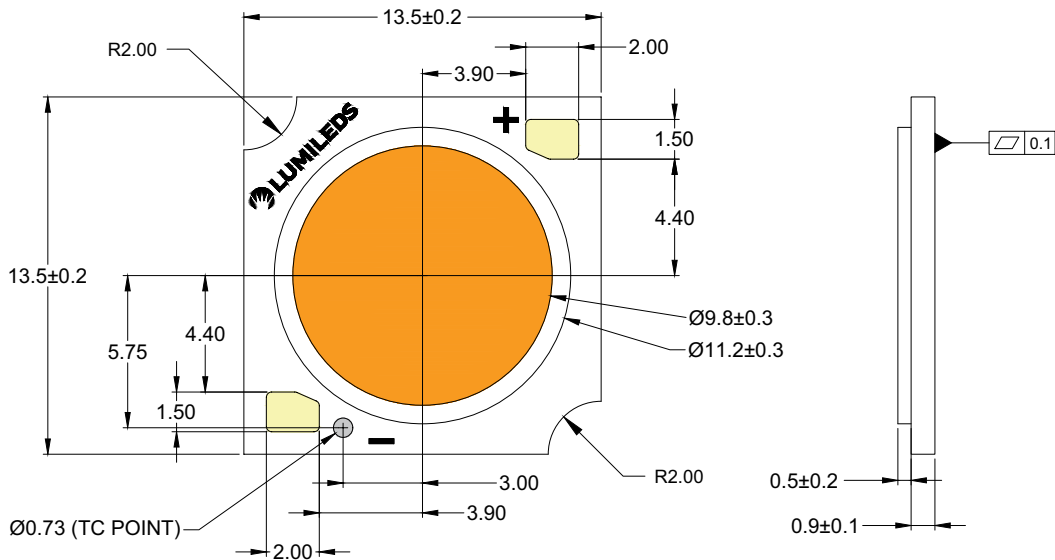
Mechanical dimensions for L2C6-xxHGxL03x0900 and L2C6-xxHGxL04x0900.
